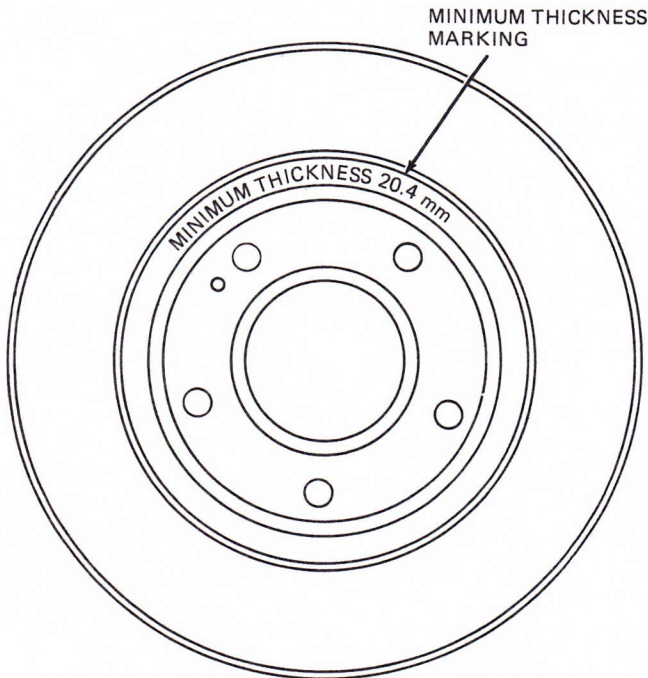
Minimum thickness, or discard thickness, marking on a disc-brake rotor. (Chrysler Corporation)
